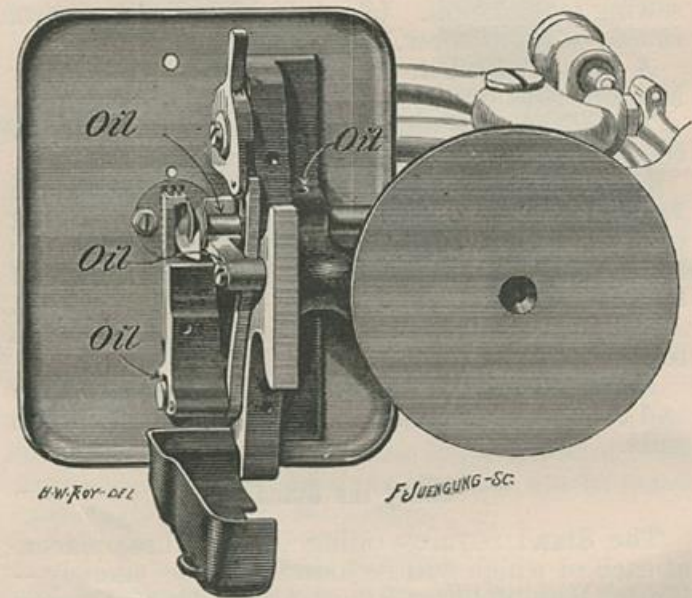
SHOWING PLACES TO BE OILED UNDERNEATH CLOTH PLATE IN OUR OLDER AUTOMATIC MACHINES, NOT HAVING "OIL HOLES" IN CLOTH PLATE.
